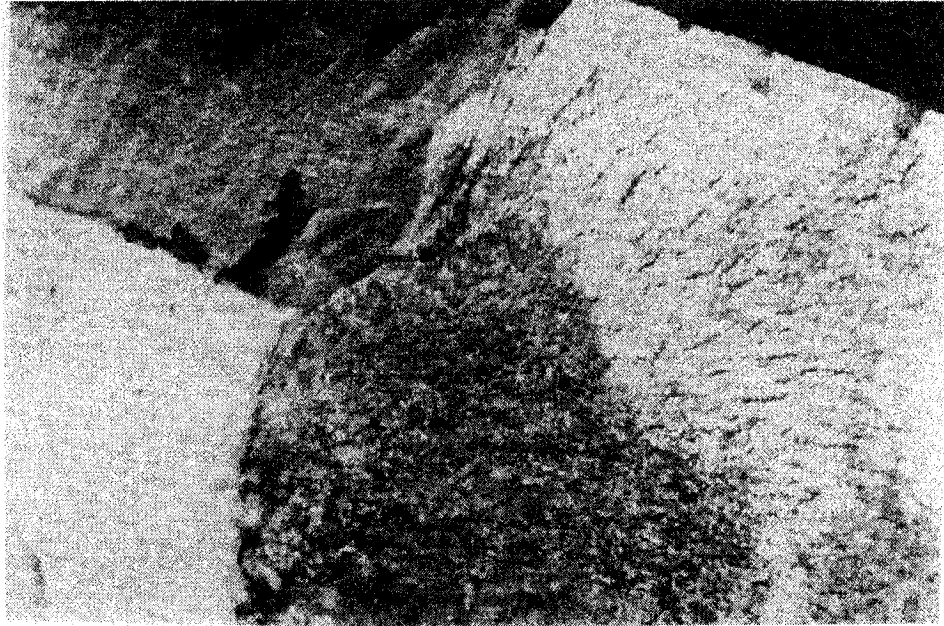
Brittle Fracture Surface Showing Classic Herringbone Pattern and Shear Lips
